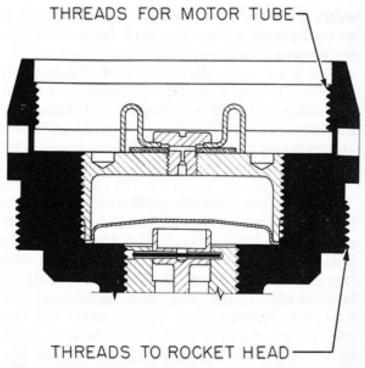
Motor Adapter in Fuzes Mk 161 and Mk 165
